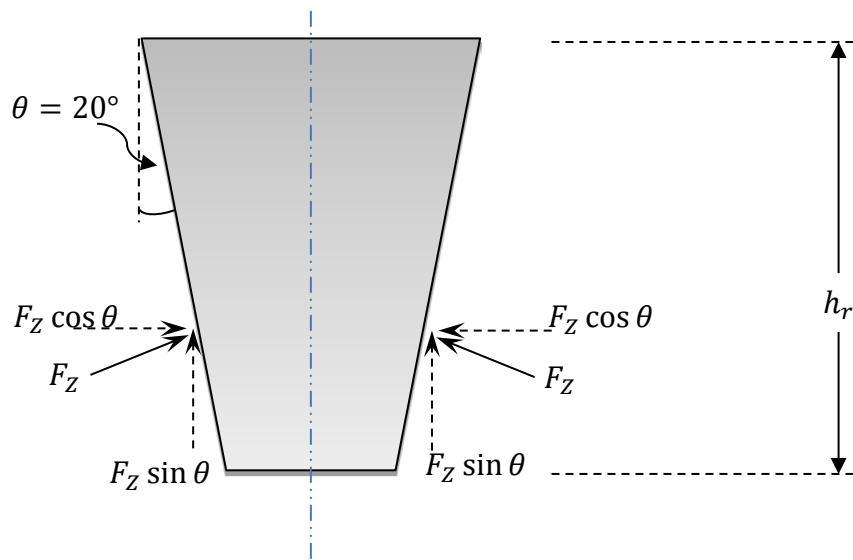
Transverse force acting on the belt V-rib cross section due to normal force acting from the pulley in the rib
